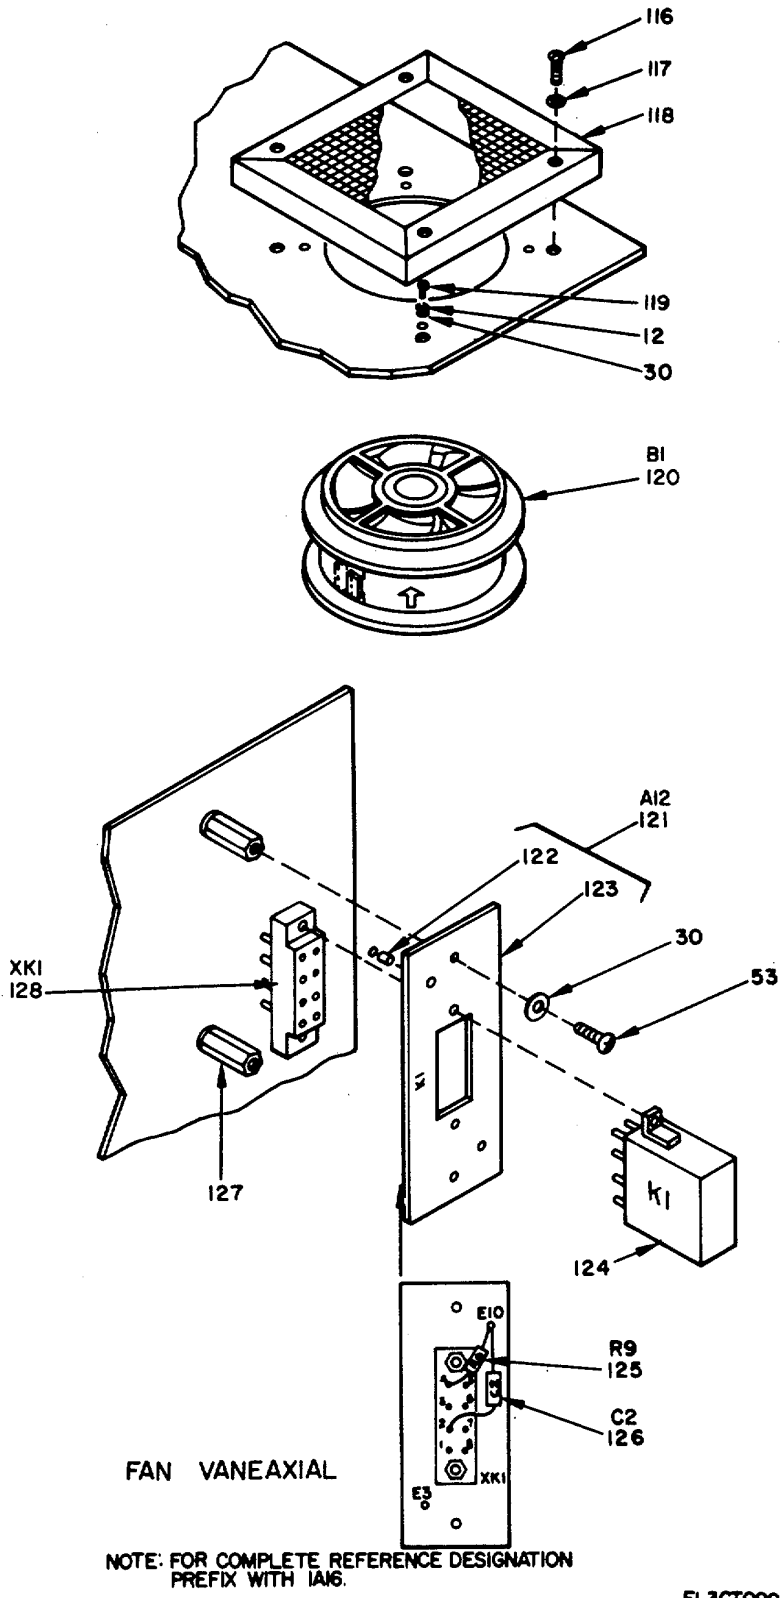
Cabinet, Electrical Equipment 1A16 (Sheet 2 of 3).
